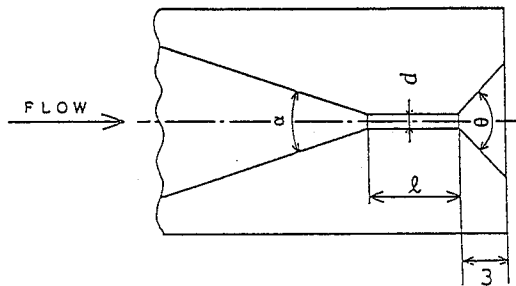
SCHEMATIC GEOMETRY OF WATER JET NOZZLES TESTED
